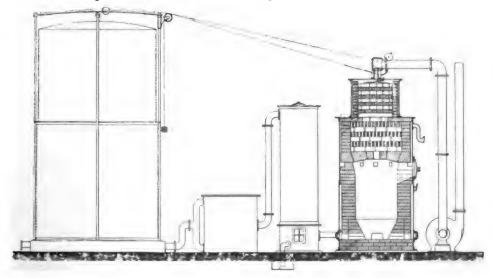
Sectional Elevation of Simplex Gas Plant for Cheap Fuels.
